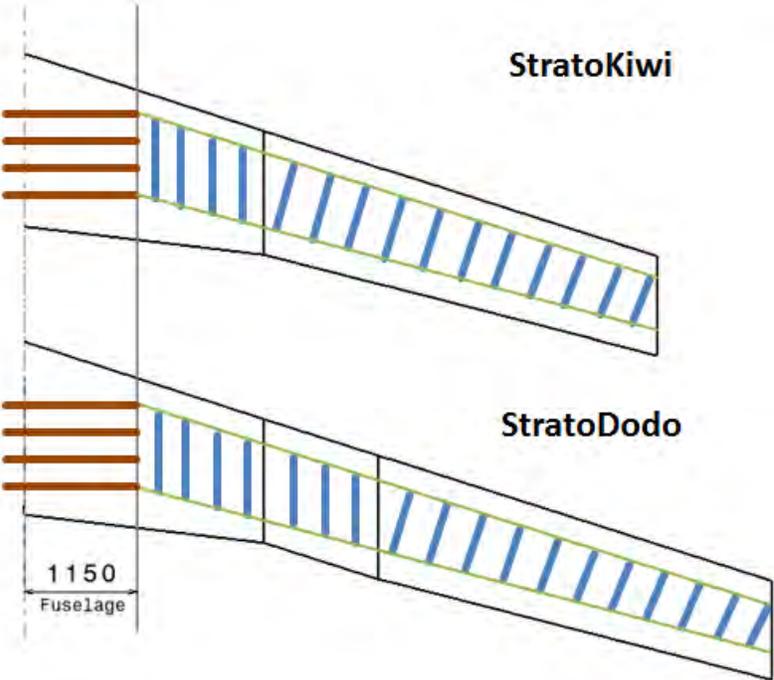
Layout of Ribs, Spars and Wingbox Structures
